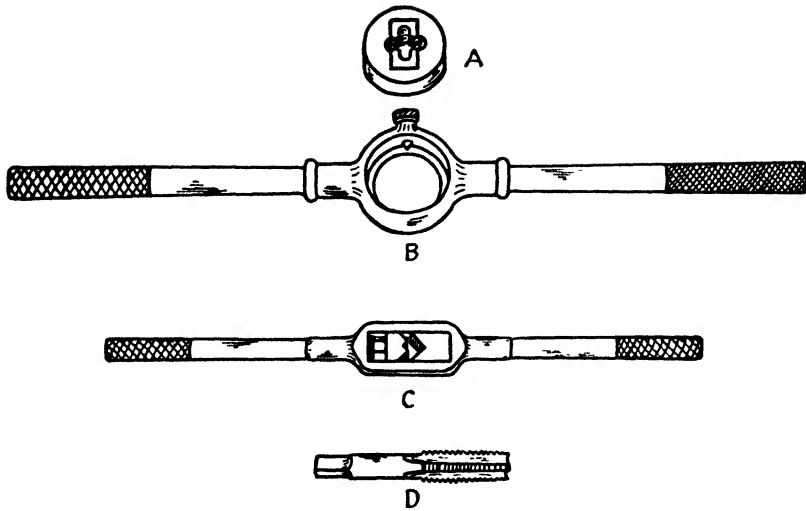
Threading tools: A, die; B, stock for holding die; C, tap wrench; D, tap.
